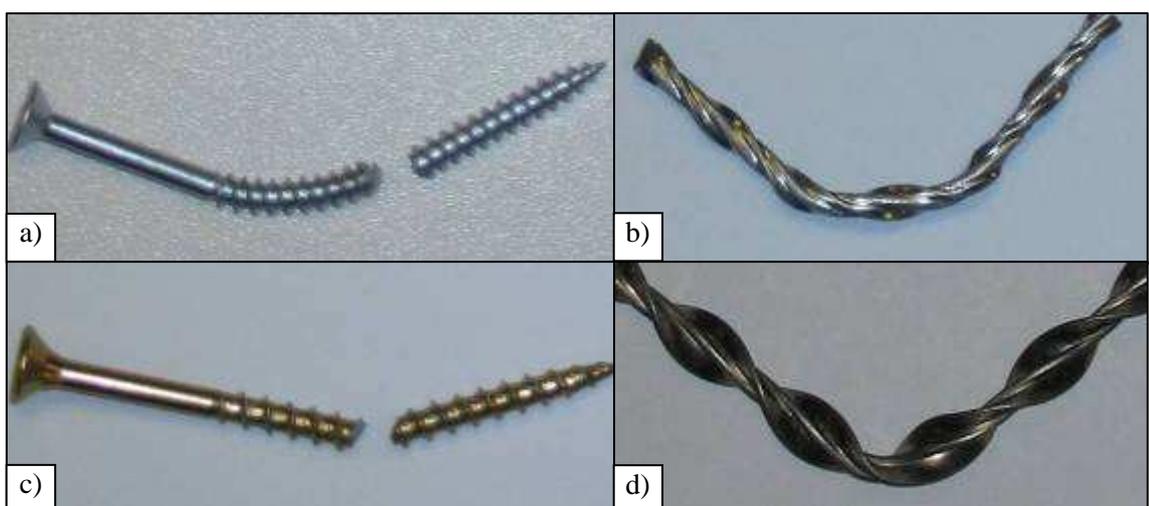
Typical four points bending test ductile and brittle failures, and 45° limit for 51mm span test set up.
